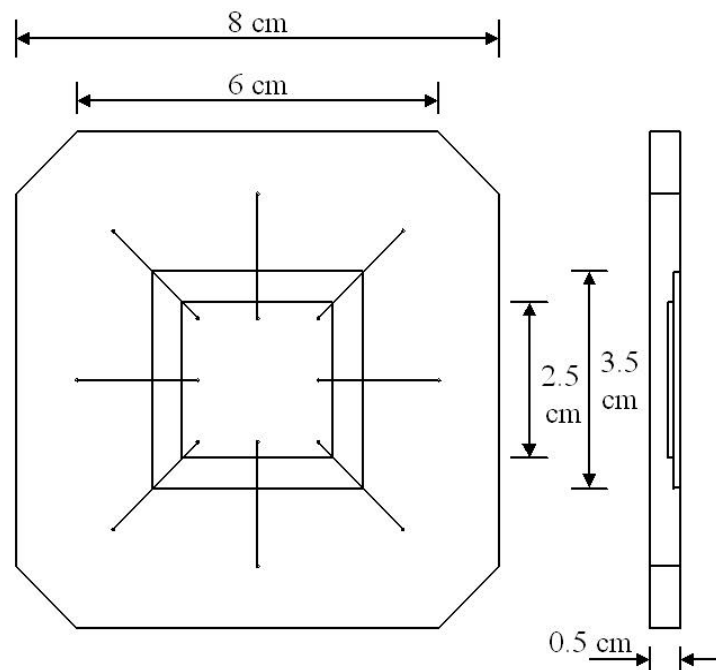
Dimension of scale-up eight-wire PBGA model of stacked die.
